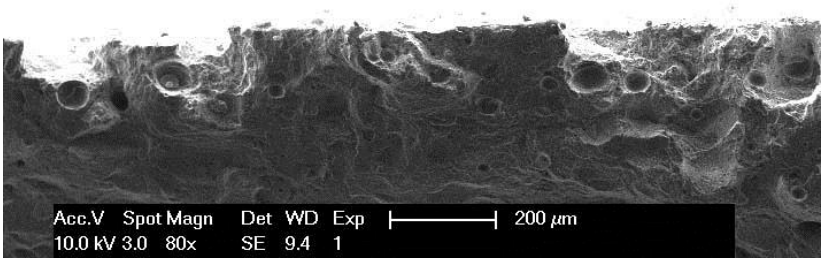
Fracture Surface of a SLM-produced A360.0 sample. The border of the broken test sample is shown, where the keyhole porosity initiated cracks towards the side of the sample.
